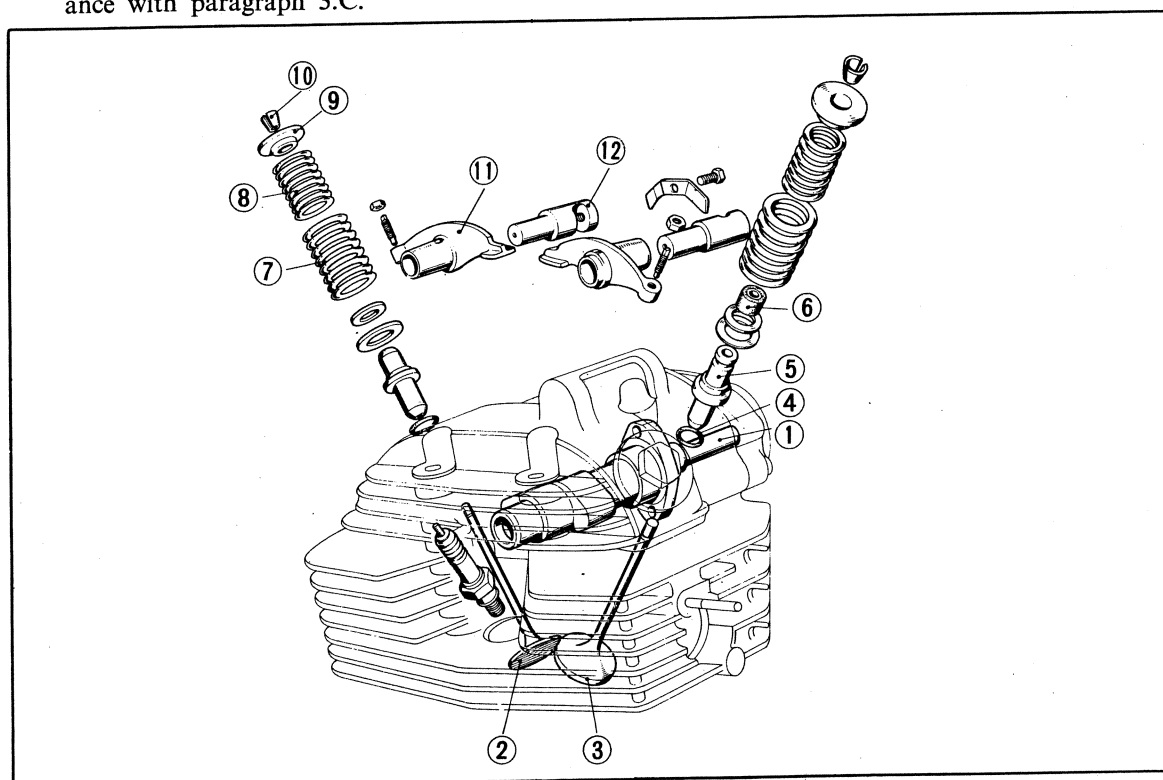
① Camshaft ② Inlet valve ③ Exhaust valve ④ O ring ⑤ Valve guide ⑥ Valve stem seal ⑦ Valve outer spring
